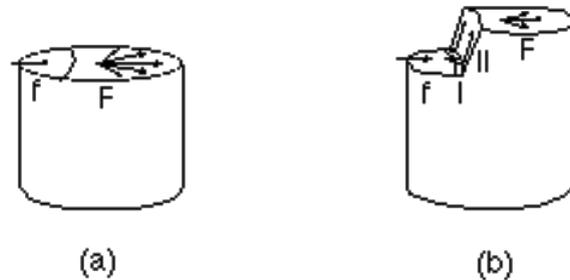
Fracture modes: (a) slightly drawn steels 0-3; (b) heavily drawn steels 4-6; f: fatigue precracking; I: mode I subcritical cracking, II: 90° propagation step; F: final fast fracture.
